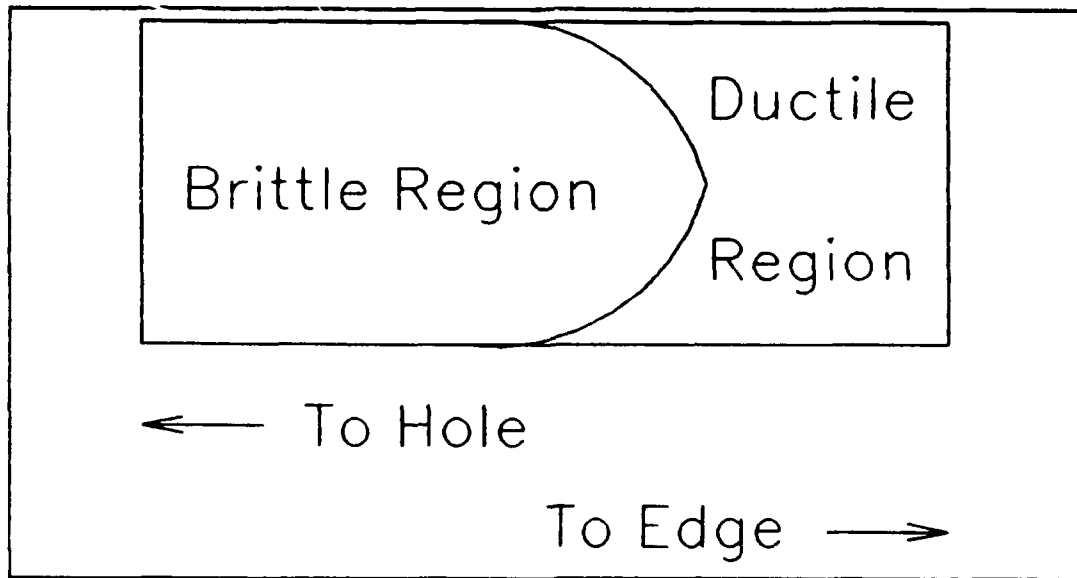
Fatigue Crack Shape Prior to Failure
